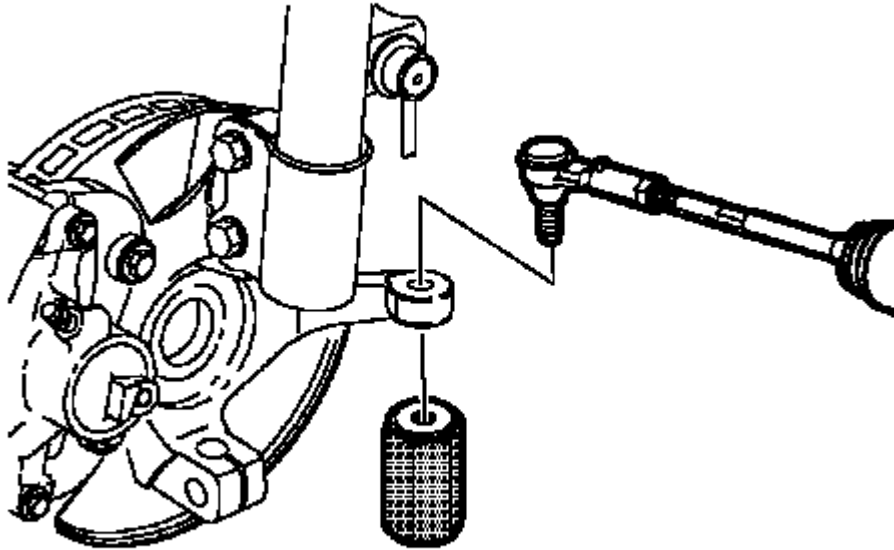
View Of Tie Rod, Knuckle & Tapered Ball Stud
